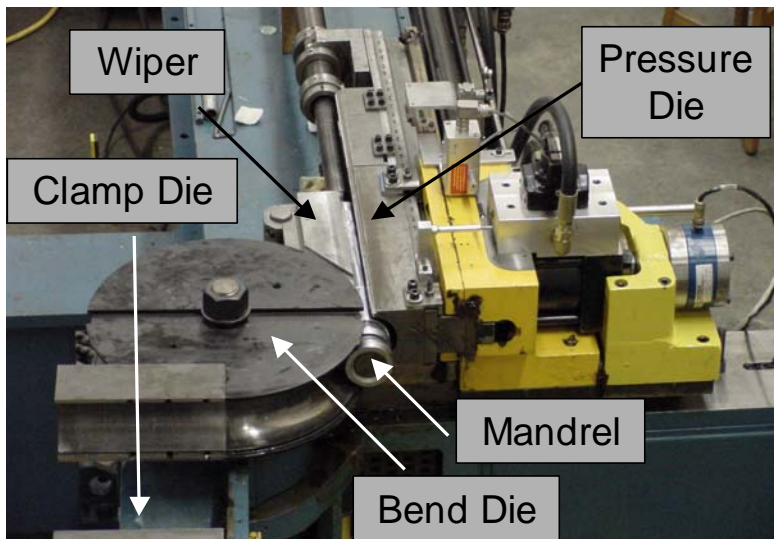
Eagle EPT-75 mandrel rotary-draw tube bender
